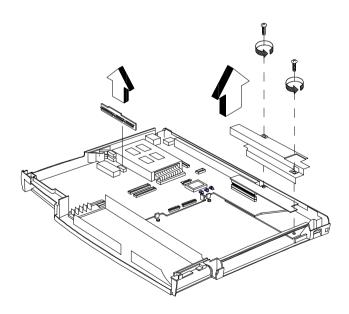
Removing the Keyboard/Touchpad Board and DC-DC Converter Board Cover
